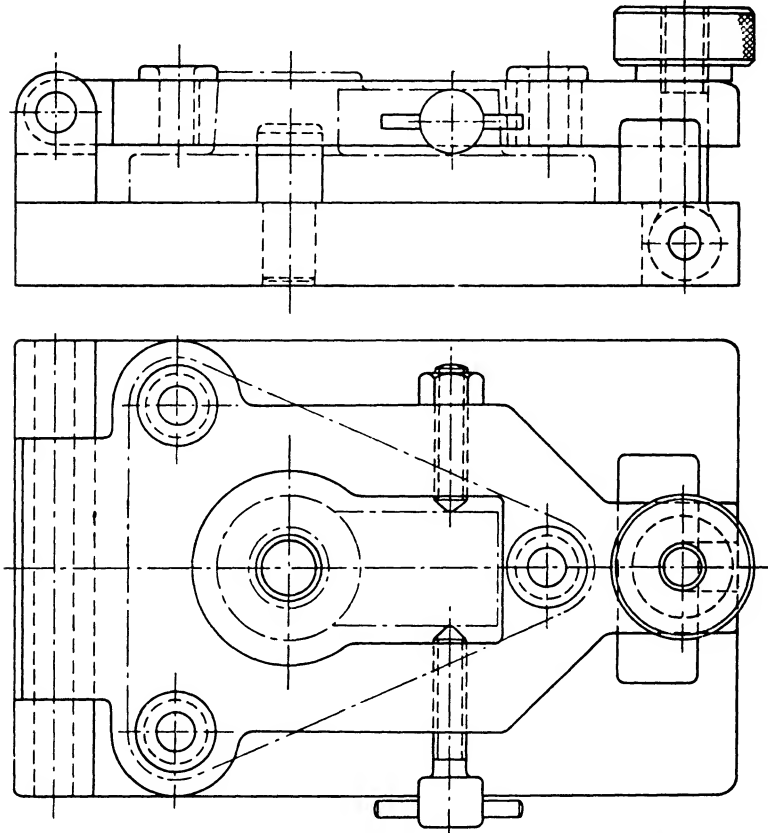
THIRD OPERATION JIG (J 3) FOR DRILLING $\frac{5}{16}$ IN. DIAMETER HOLES
